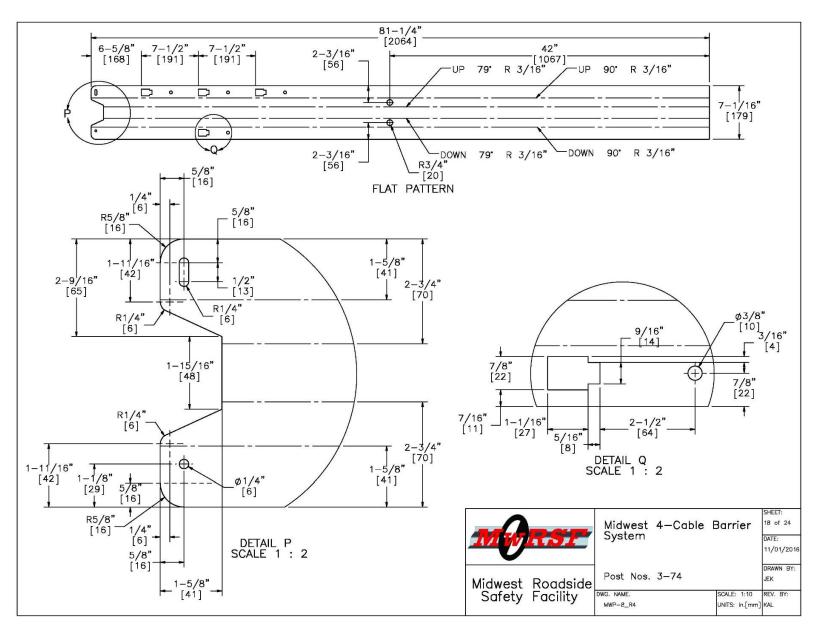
Post Nos. 3 through 74 Details, Test No. MWP-8
